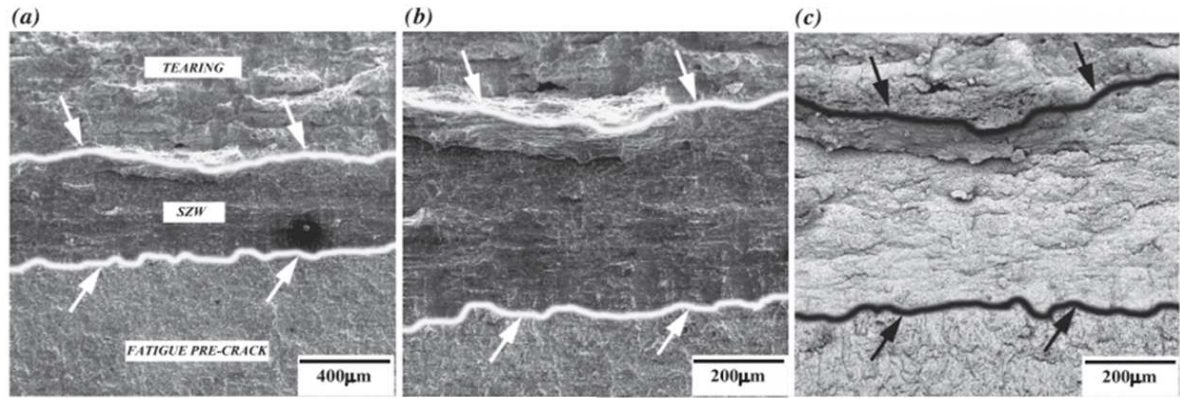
SEM fractographs taken from fractured Charpy impact specimens: (a) general view of SZW; (b) magnified view; and (c) back scatter image. The beginning and end of the SZW are arrowed. Crack growth direction is from the bottom to the top of the figure [177].
